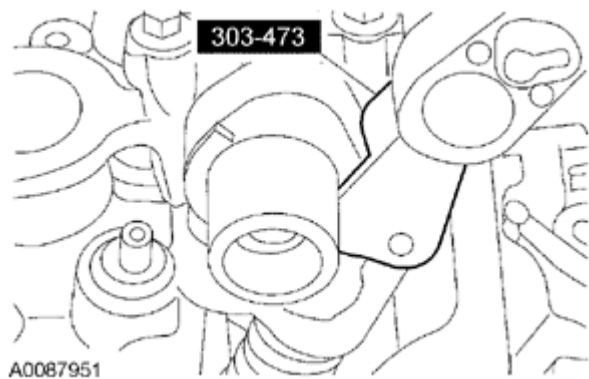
Remove/Install Key, Retainer And Valve Spring Using Valve Spring Compressor
